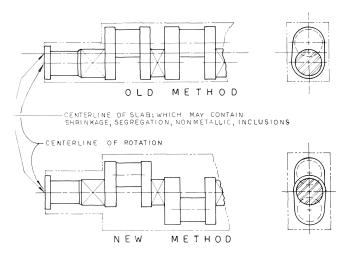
Two Methods of Forged Slab Layout Used in Fabricating Large Twisted Crankshafts.
